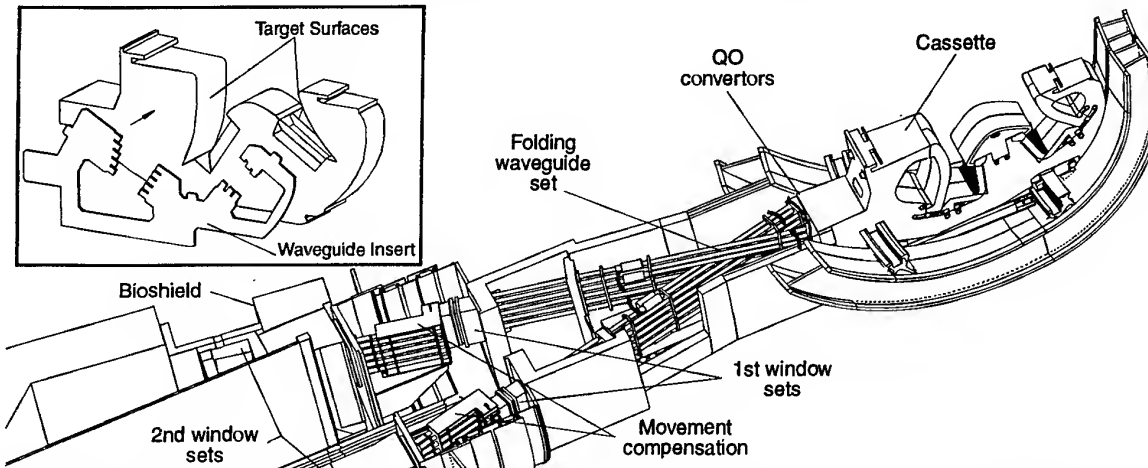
View of one of the divertor transmission systems to the second vacuum boundary, showing key sub-assemblies. Inset: the assembly of the waveguide insert into the divertor cassette.
